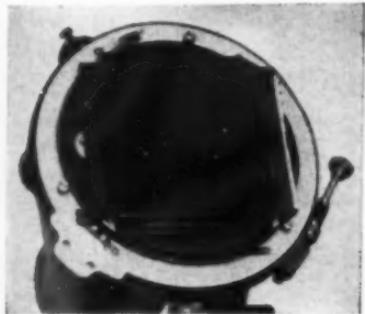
Adapter with photo plate holder placed over Comparator screen for making photographic records.
